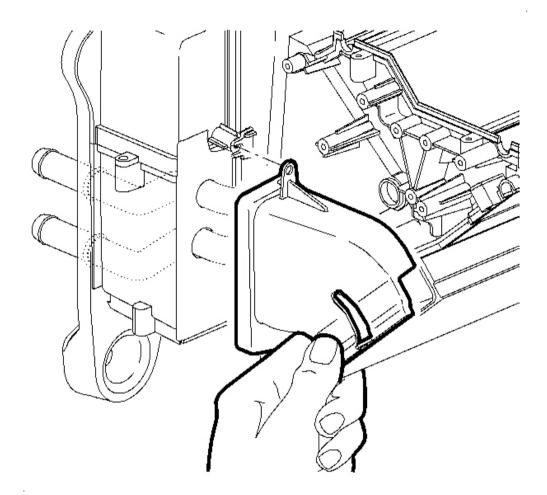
Heater Core & End Tanks Courtesy of GENERAL MOTORS CORP.
